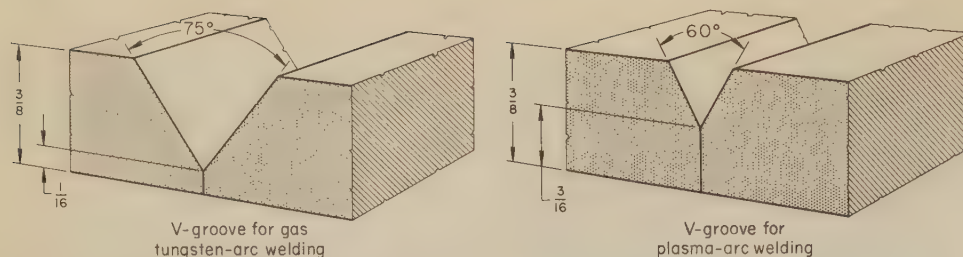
Comparative typical joints for a V-groove weld to be made in  $\frac{3}{8}$ -in. metal by gas tungsten-arc welding and by plasma-arc welding
